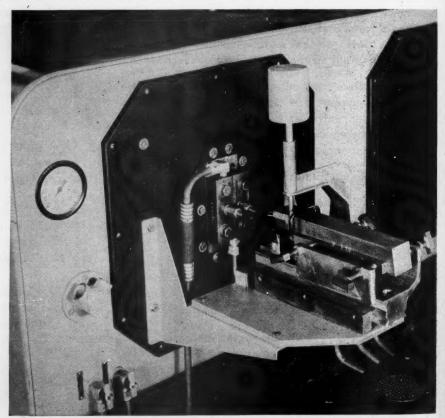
Carbide tips are brazed on cutting tools with this standard fixture for induction heating equipment. Simple design of inductor loop and adjustable fixture handles complete range of tool sizes and shapes.
